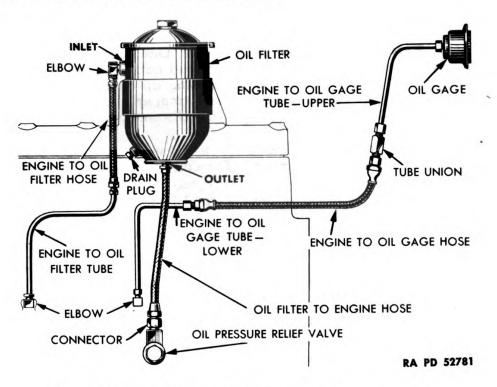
Oil Filter and Oil Gage Hose and Tubing
